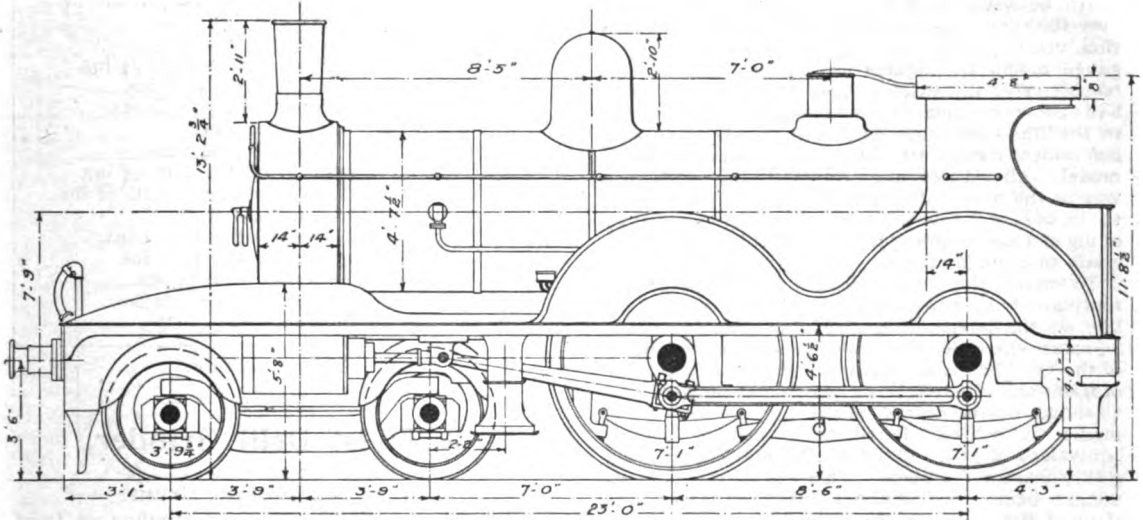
MR. ADAMS' L.S.W.R. 4-4-0 TYPE OUTSIDE CYLINDER EXPRESS ENGINE, NO. 580 CLASS.
